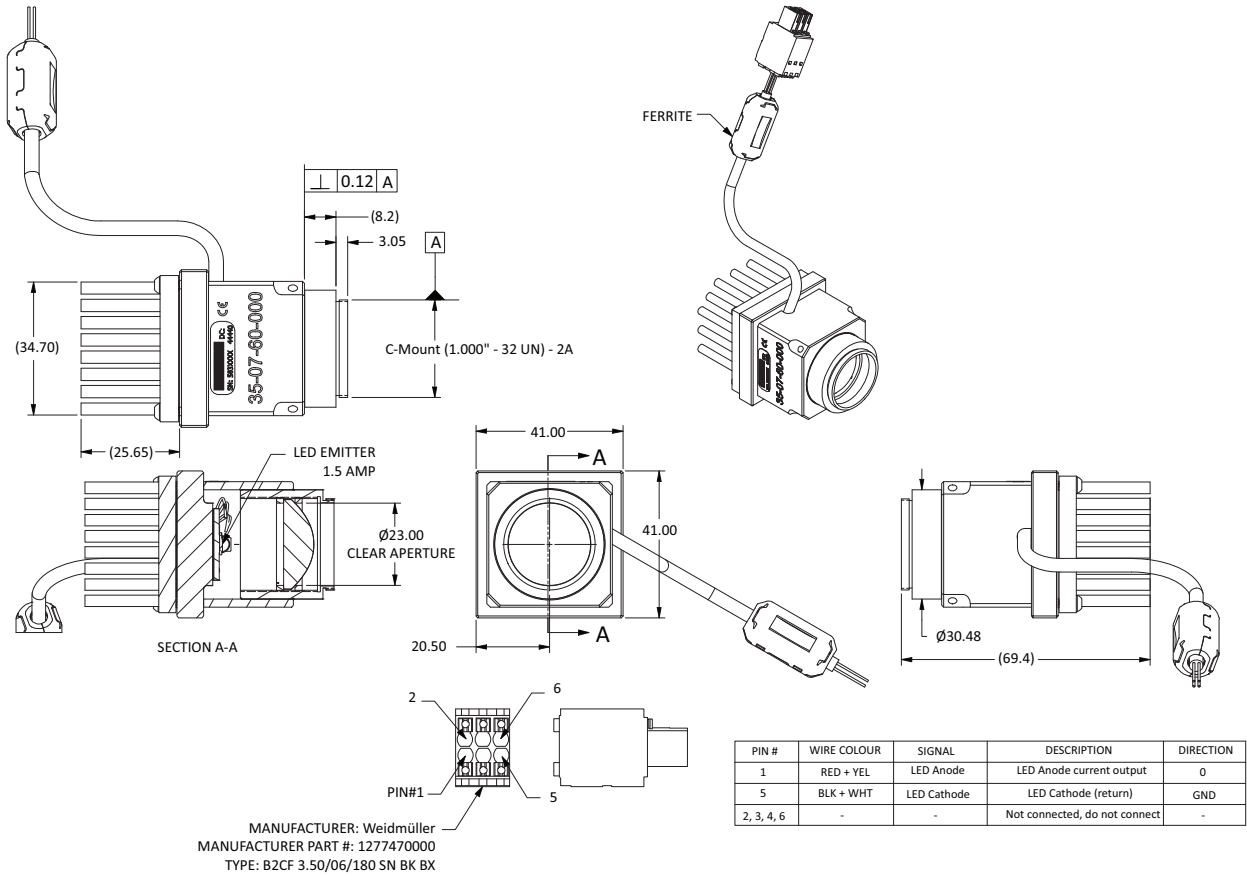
Optem® FUSION Illuminators – 1.5A Unit Dimensions
